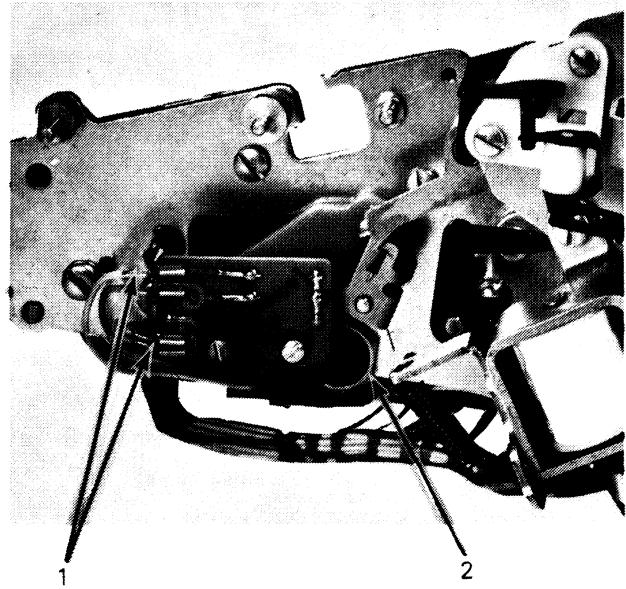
Keyboard Removal (Right Side of Keyboard)
